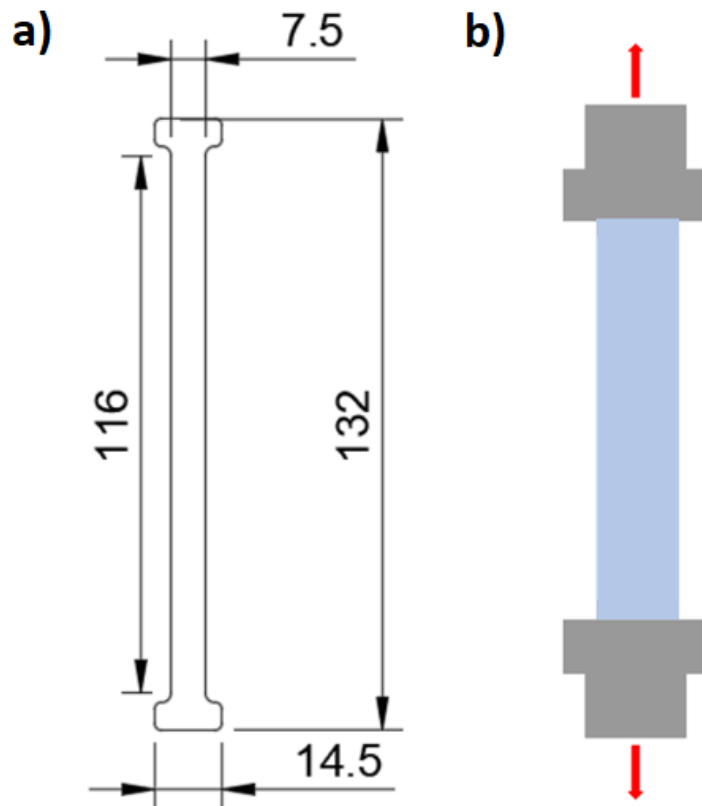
a) COC E-140 sample dimensions for uniaxial tensile testing. b) Schematic showing how the COC E-140 sample will be glued between laser cut acrylic sample holders so the COC E-140 sample can be clamped onto.
